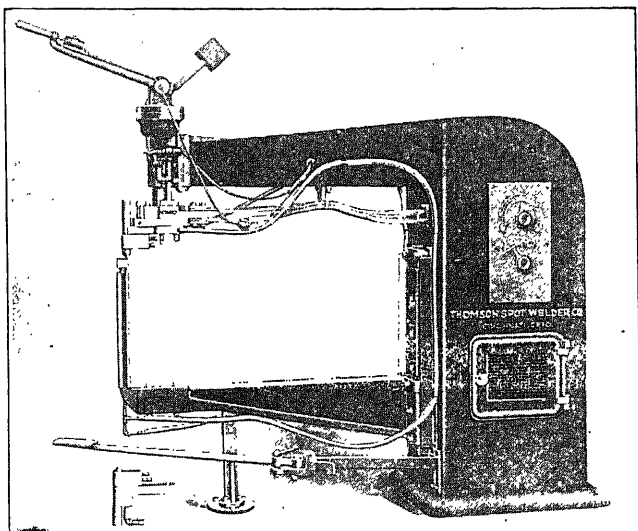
A Thomson Heavy-Duty Spot-Welding Machine.
